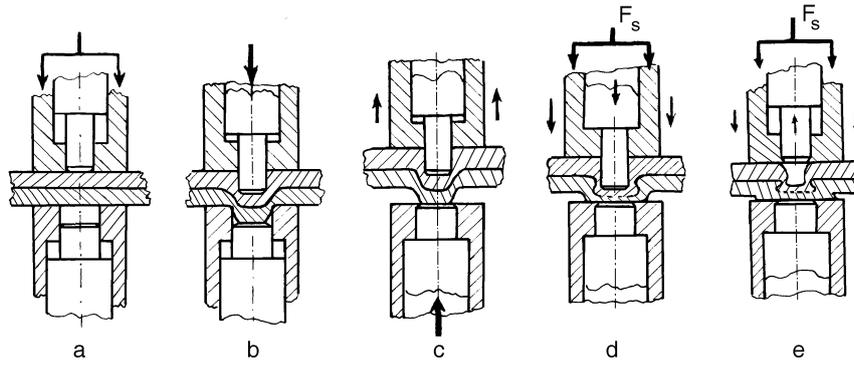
Cold spot welding combined with self-piercing joining, using coaxial punches
